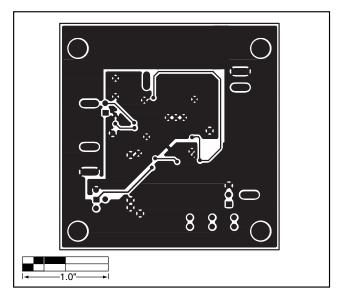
MAX1757/MAX1758 EV Kit PC Board Layout—Solder Side
